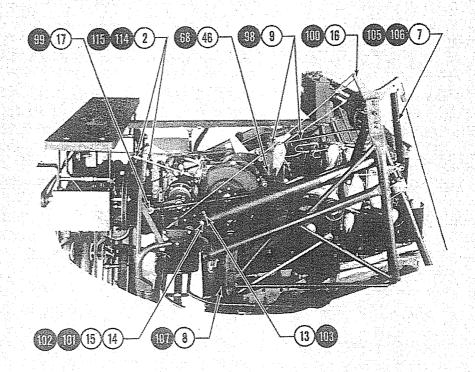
1 to 1 Shaft, Removal and Installation Sequence
